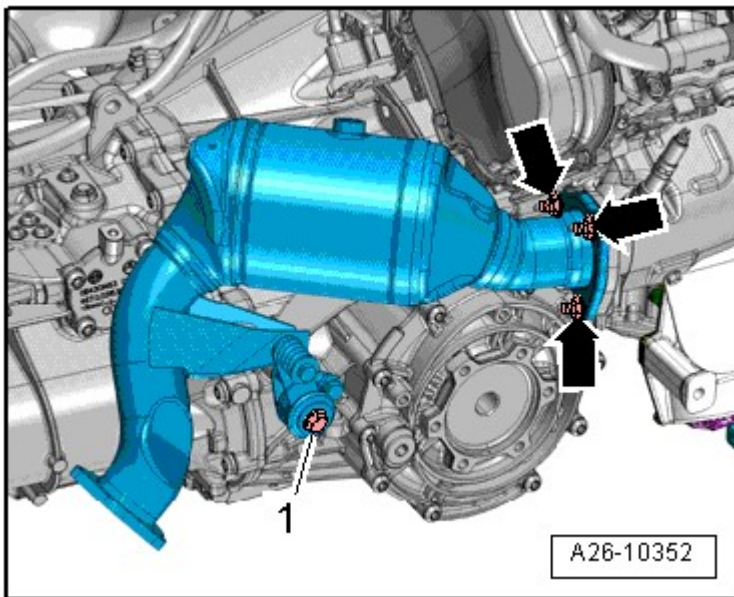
Identifying Nuts, Bolts And Right Catalytic Converter
